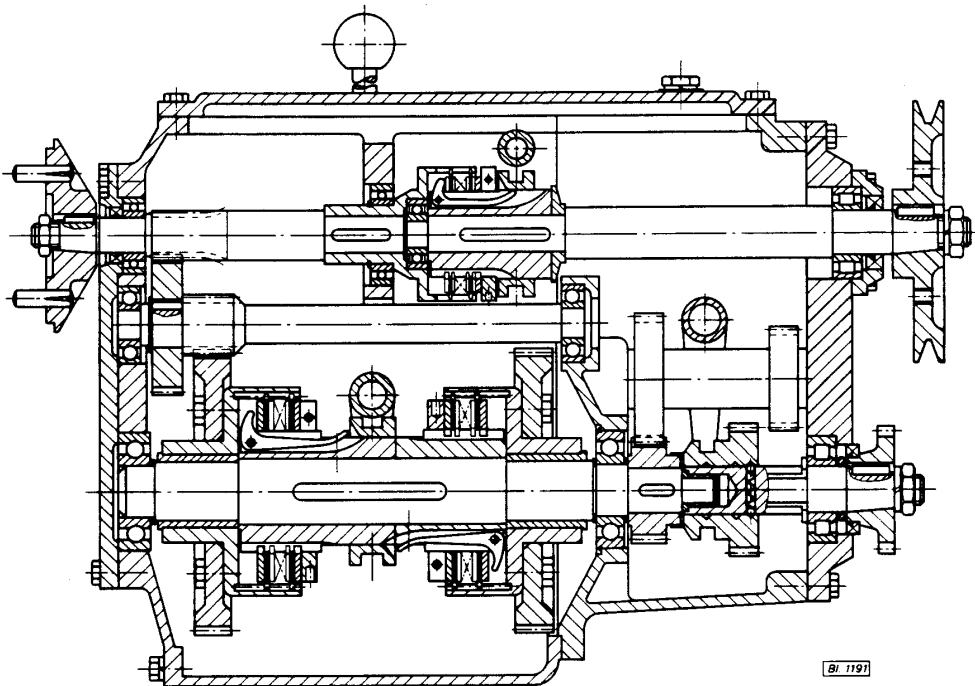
Mechanically actuated Sinus® multi-plate clutches fitted in the transmission of a vibration roller.
